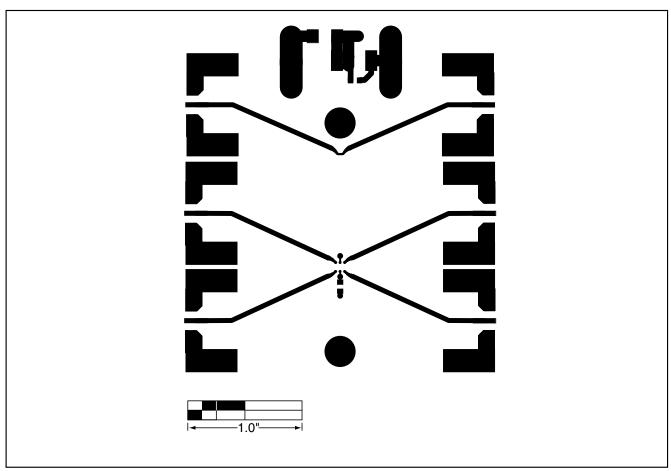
MAX3785 EV Kit PC Board Layout—Component Side
